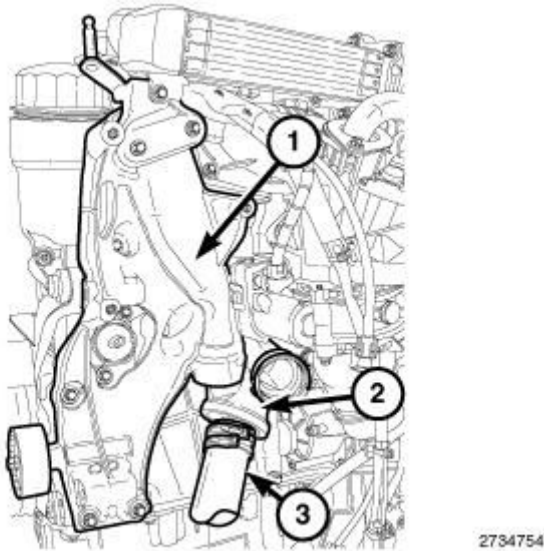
Identifying Thermostat Housing & Accessory Carrier Bracket
